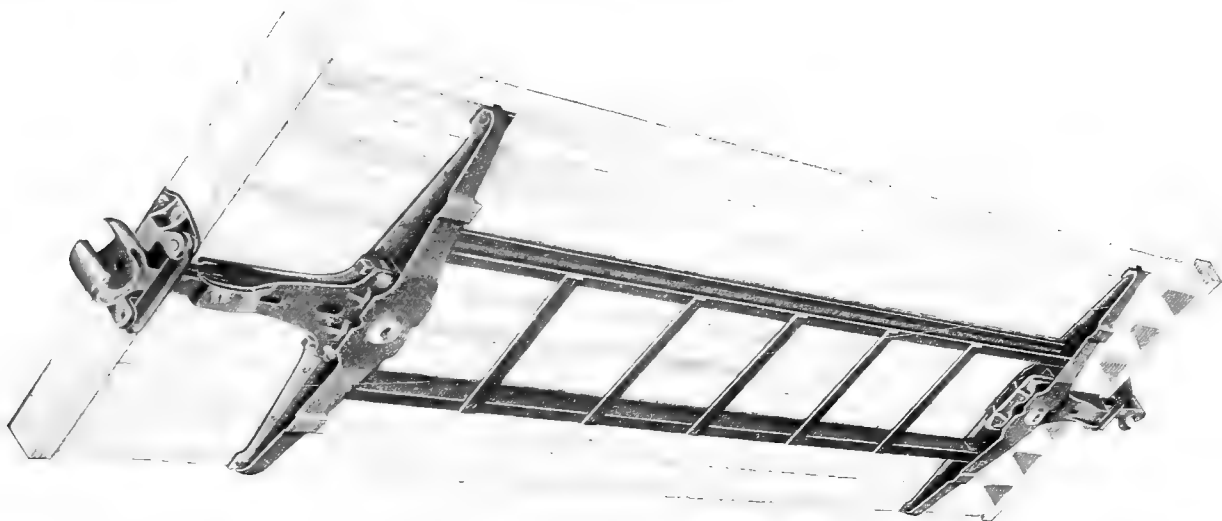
Application of Cast Steel Transom Draft Gear with Reinforcements for Old Cars. Commonwealth Steel Company
